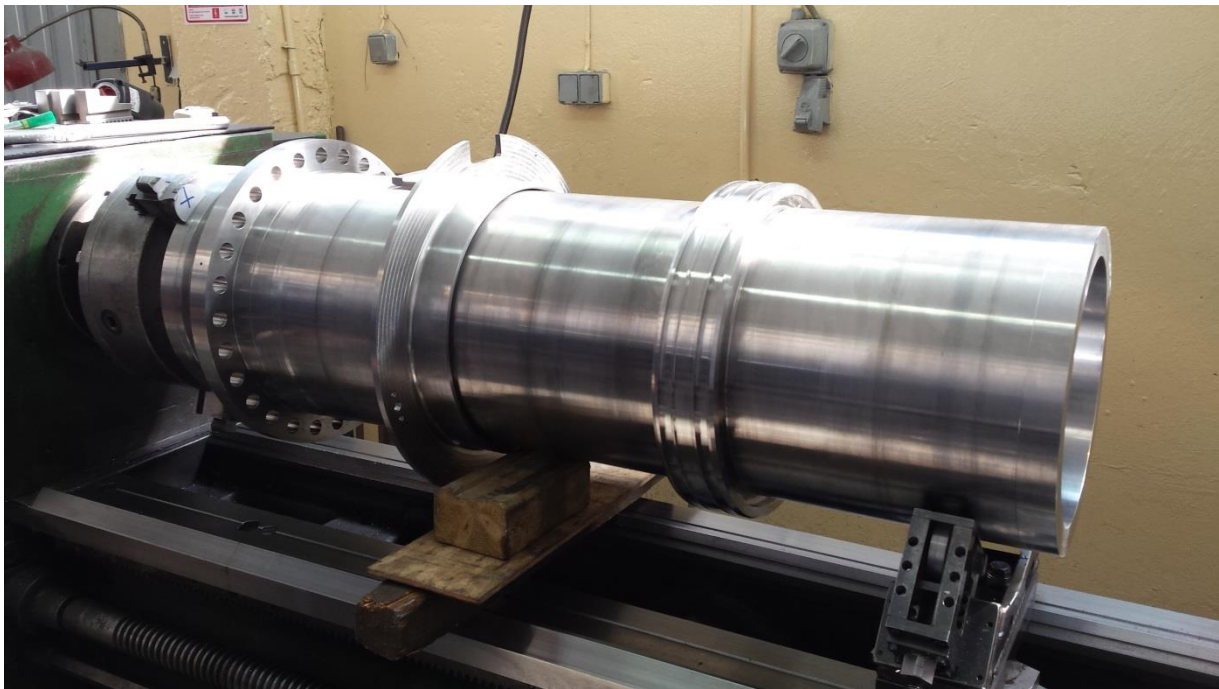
Static Frame and Piston undergoing final assembly machining @ Germany machining plant
